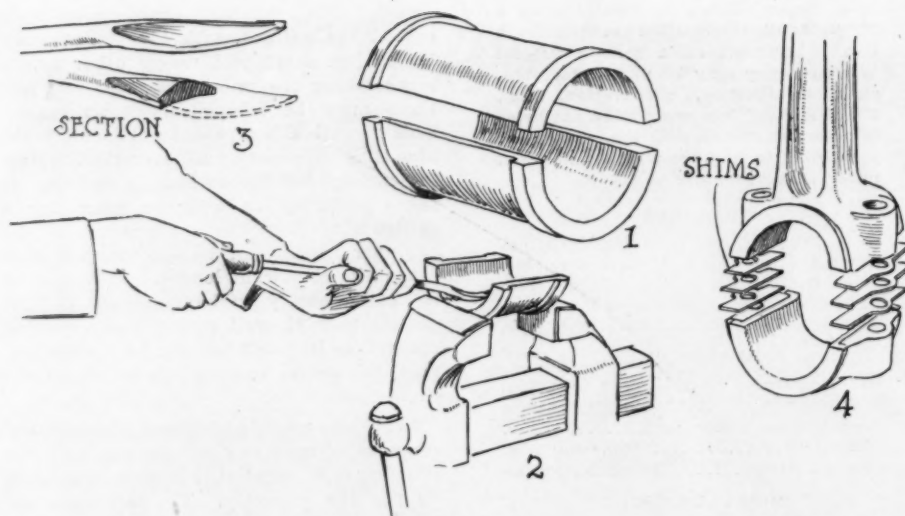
1, Ordinary form of bushing; 2, Scraping the bearing; 3, Form of scraper; 4, Connecting rod bearing shims
